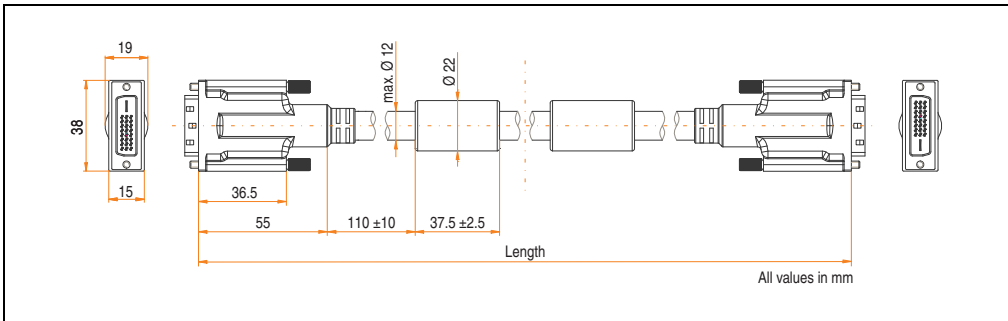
Dimensions - SDL cable 5CASDL.0xxx-03
